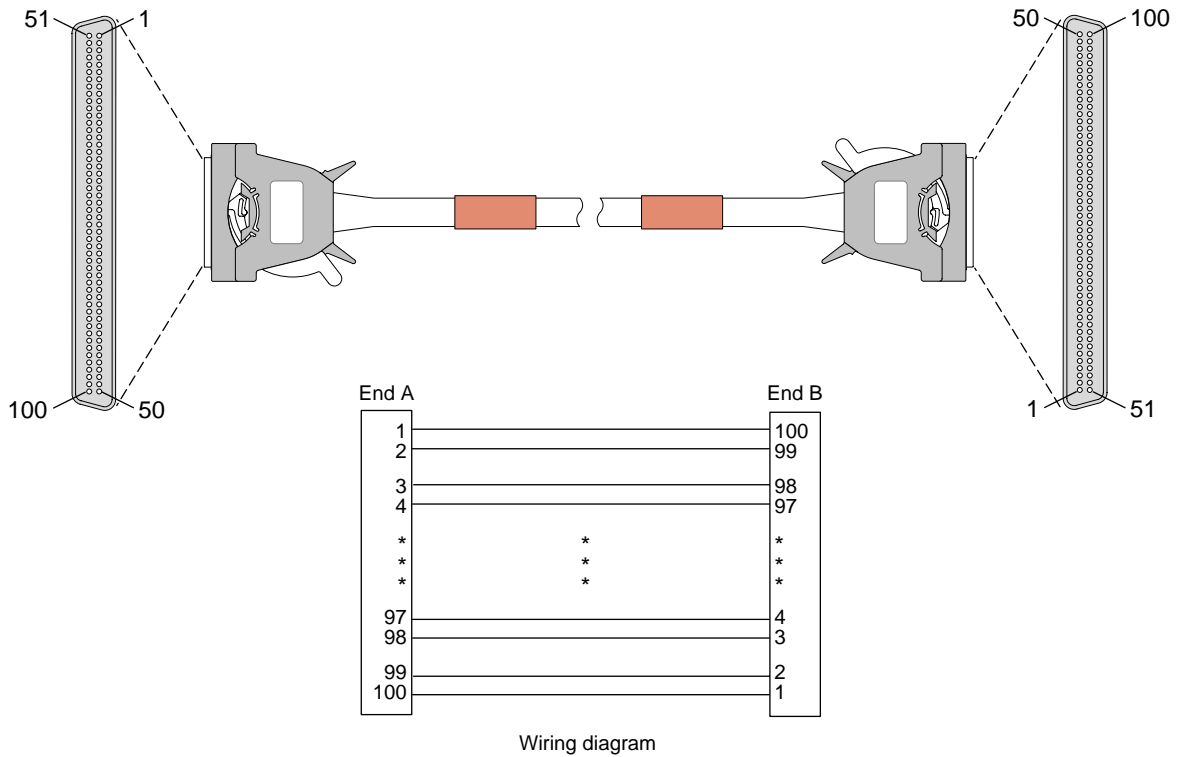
DNET Cable Assembly Pinouts and Wiring
